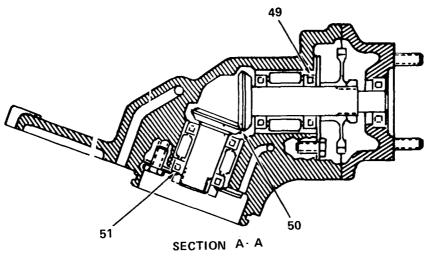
Fits, Clearances and Backlashes (T53-L-13B/703 Engines) (Sheet 4 of 4)
